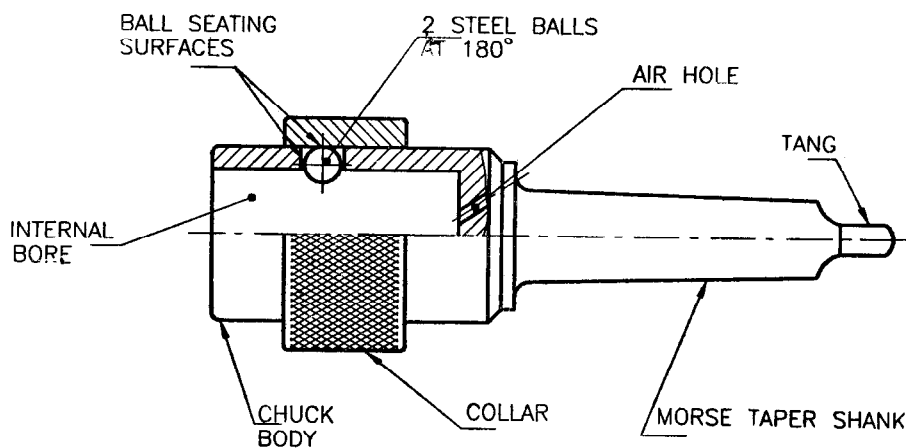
QUICK CHANGE DRILL CHUCKS — TERMINOLOGY
